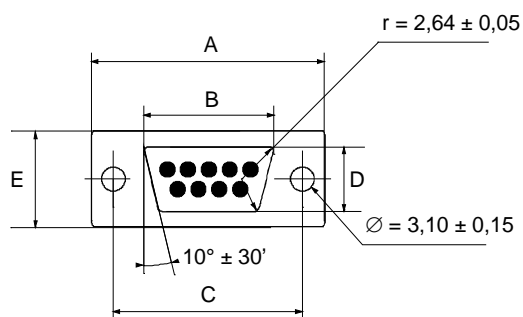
External fixed (device) side connector for typical industrial environments: dimensions
